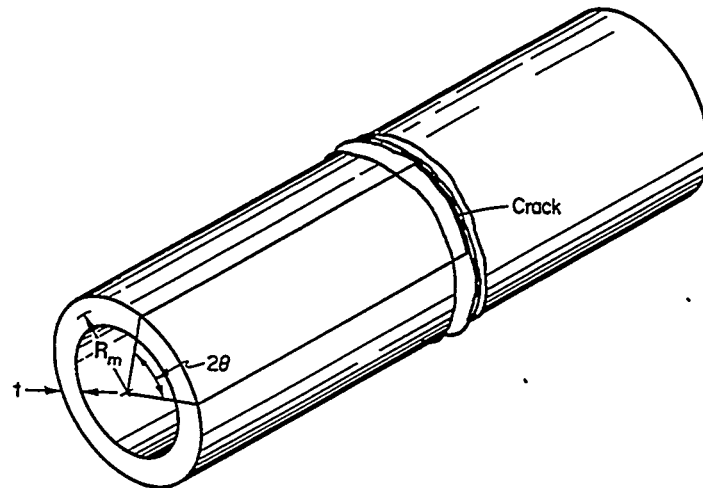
Circumferential crack in a pipe butt weld
